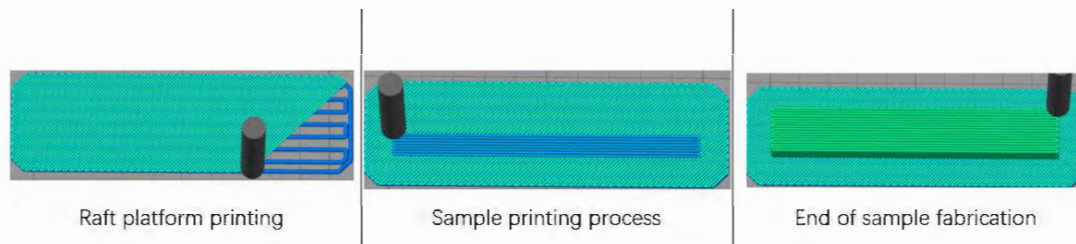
Printed 'raft platform' and specimen 3D printing fabrication
